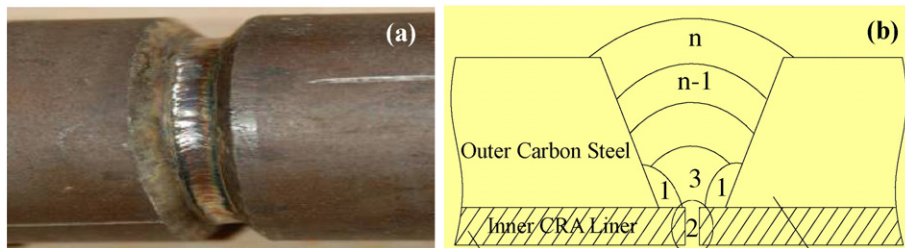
Weld joint of mechanically lined pipe and weld structure.
